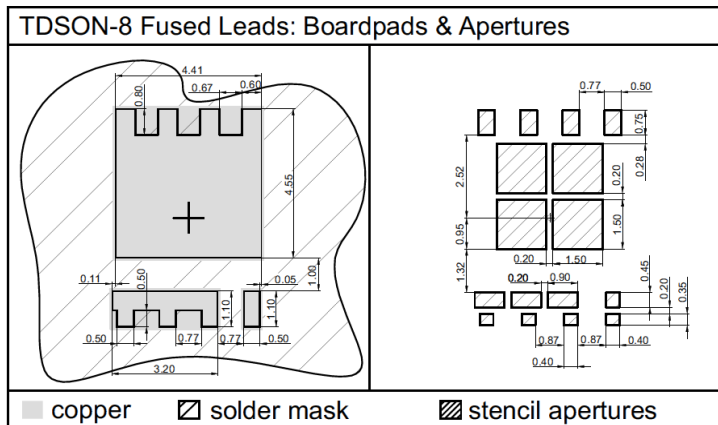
Footprint drawing PG-TDSO8, dimensions in mm
